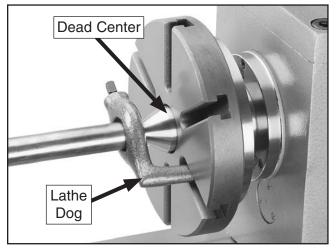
Example photo of using a dead center with a faceplate and lathe dog.
